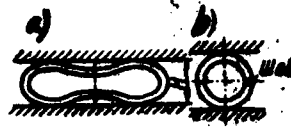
Duct testing for flattening. a) the flattening of the control sample/specimen; b) the position of the weld during testing of wrought pipes.
